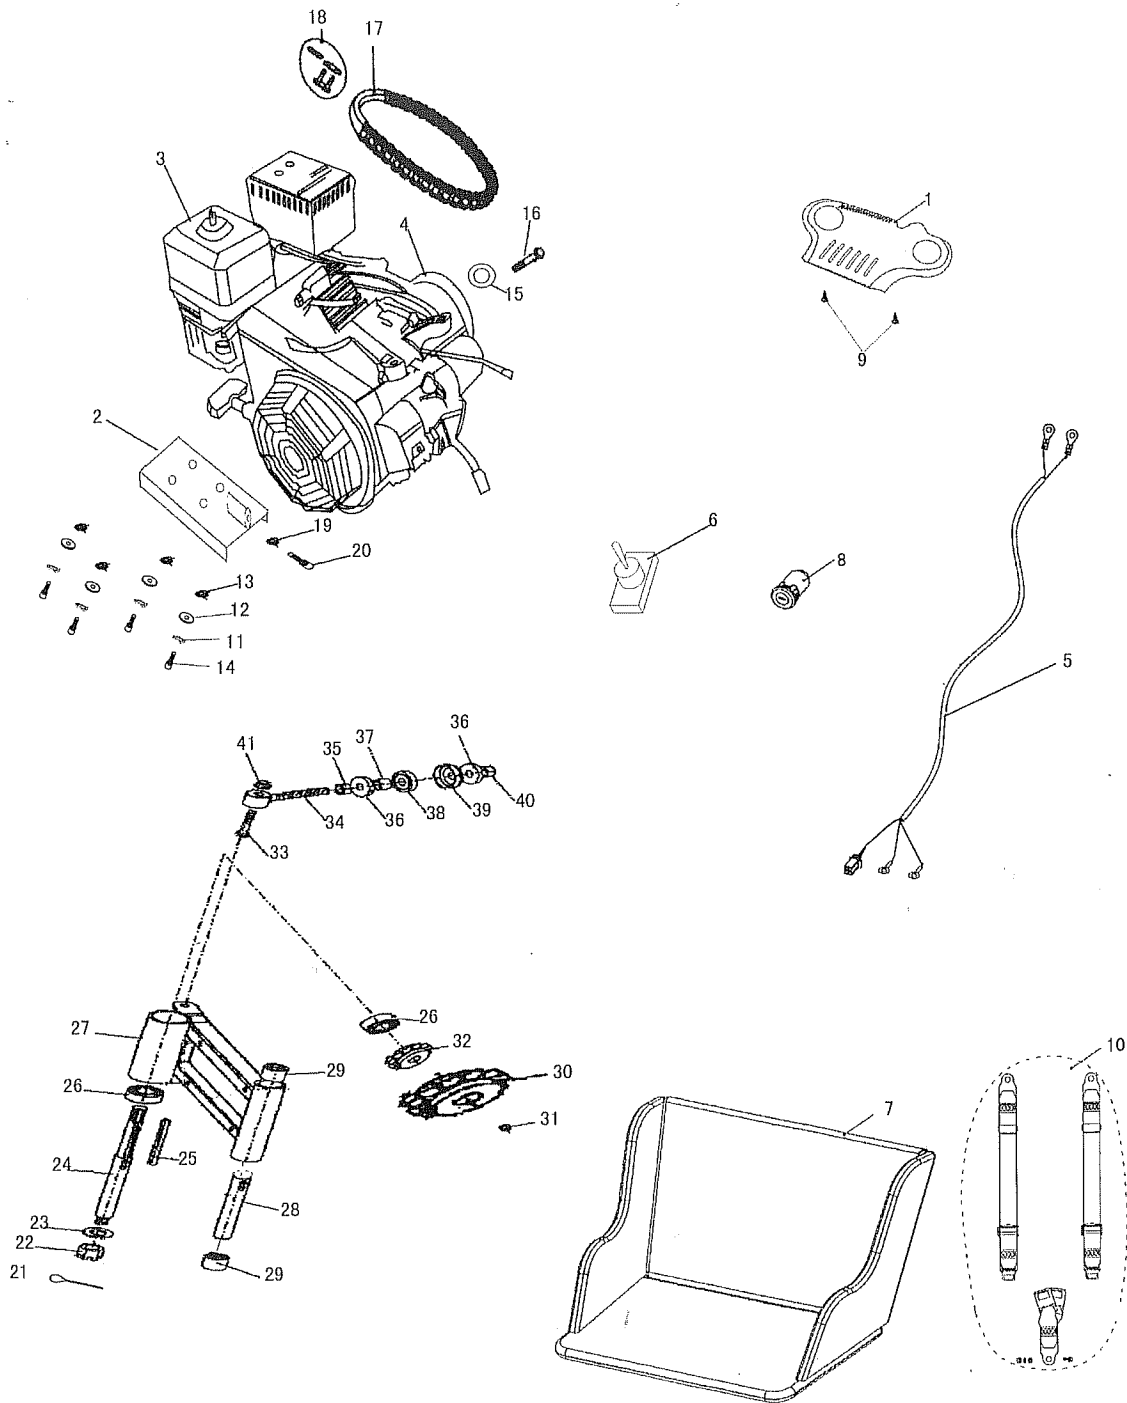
WIRE HARNESS / ELECTRICAL / SEAT
